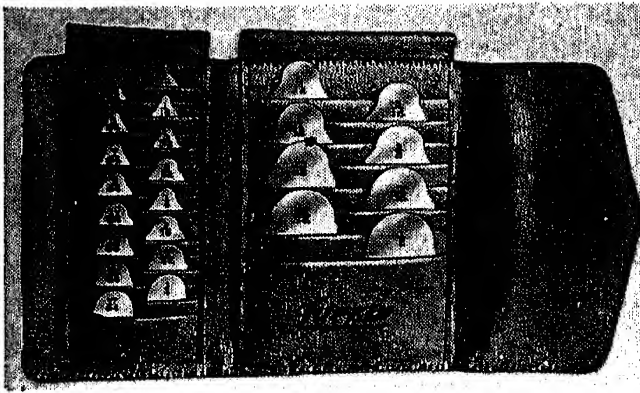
A set of radius gages. (Courtesy The Lufkin Rule Co.)
